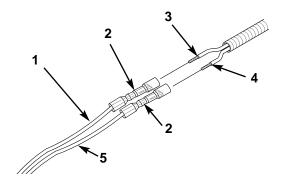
Connecting Harness Leads to Wheel Sensor Cable Leads.
